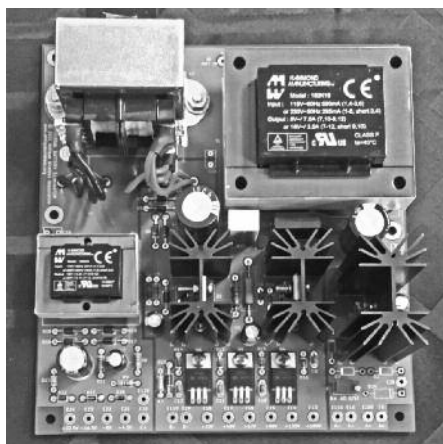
Assembled AWA Universal Battery Eliminator power supply—top view.
